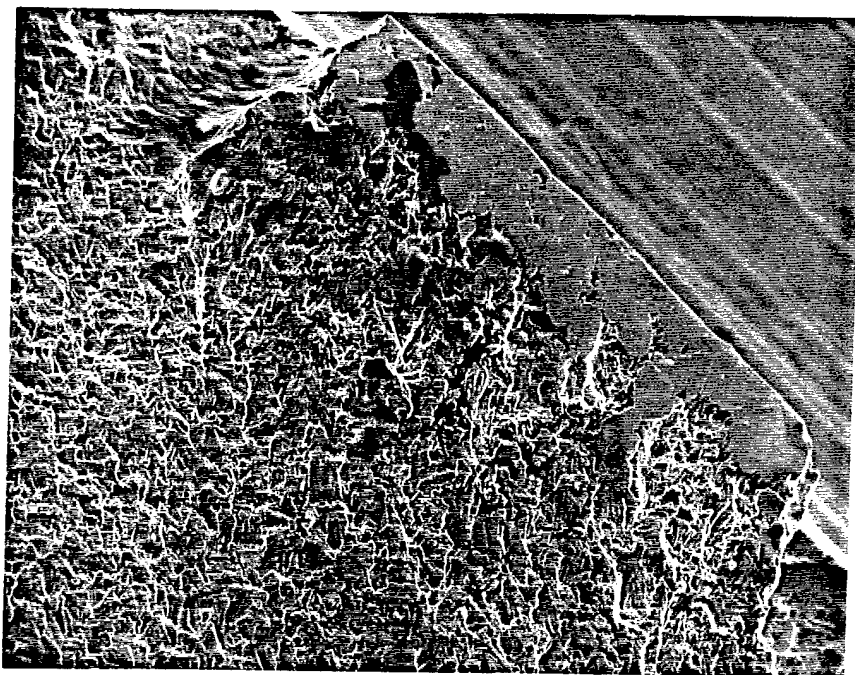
Typical Origin Located on the Fracture Surface of PUR Rod -174 (Mag. 150x).
